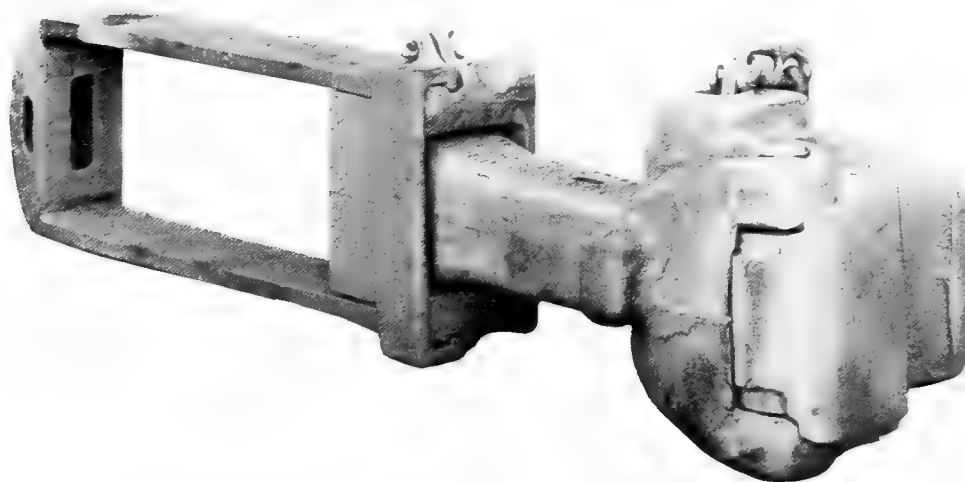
Eclipse Cast Steel Coupler Yoke. National Car Equipment Company.
